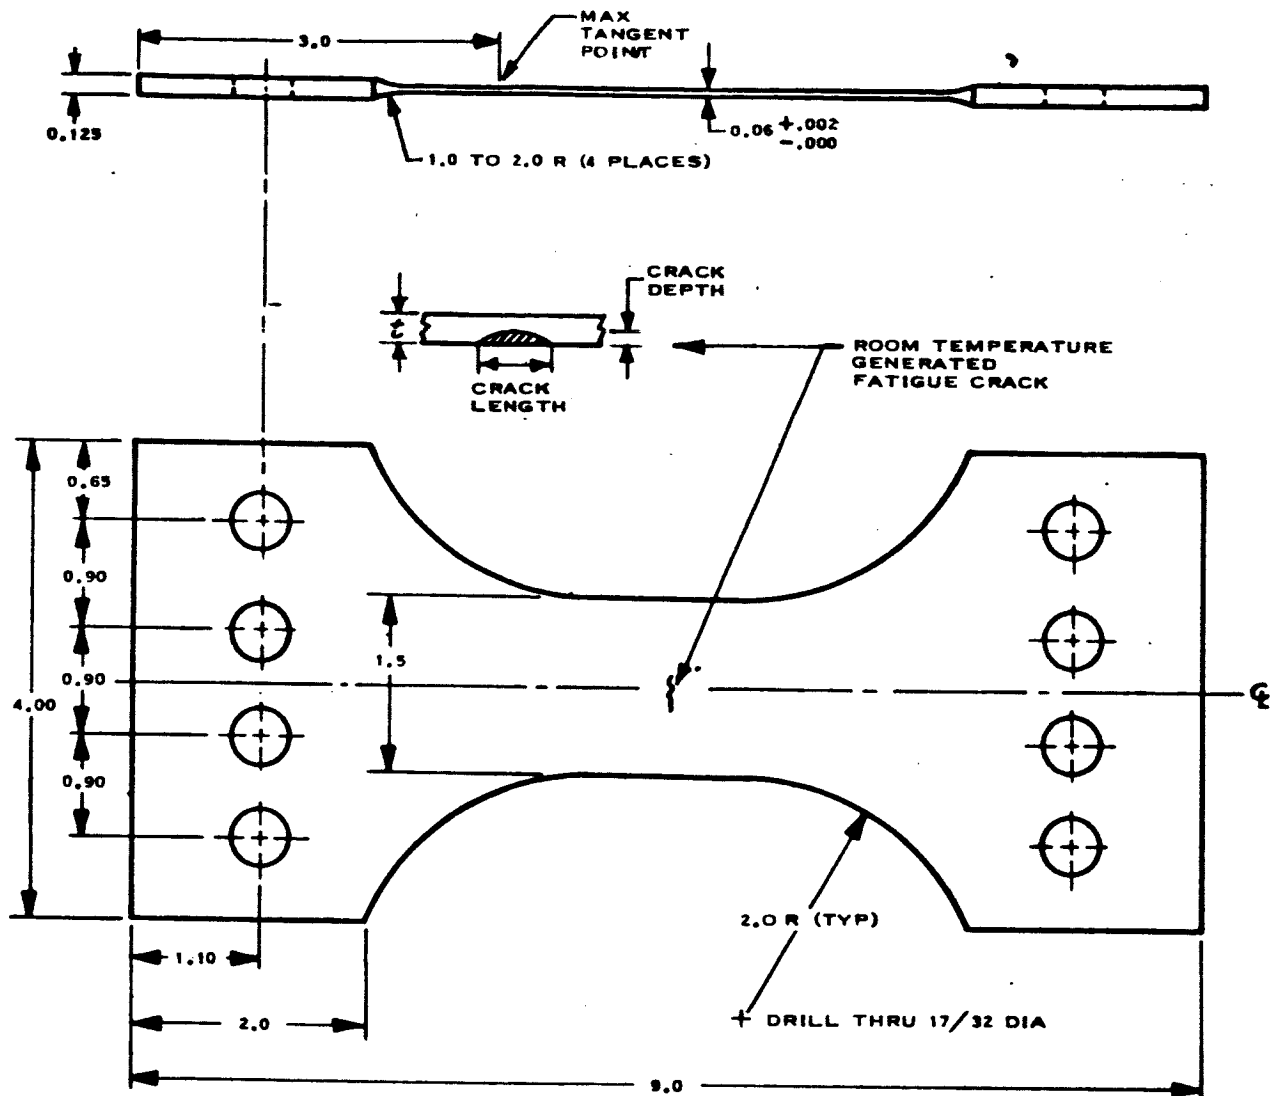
UNIAXIAL TENSILE TEST SPECIMEN
